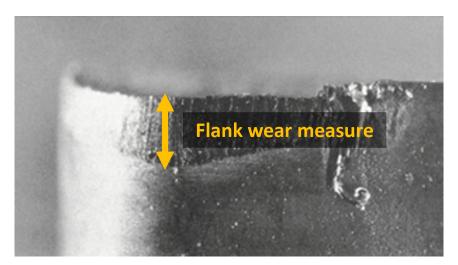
Flank wear caused by friction between the flank face of the tool and the machined work-piece surface and leads to loss of the cutting edge.
